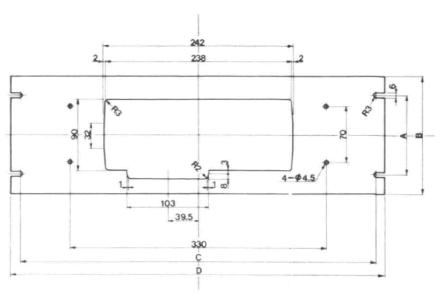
TR5821 MECHANICAL PARTS REAR PANEL ASSEMBLY
